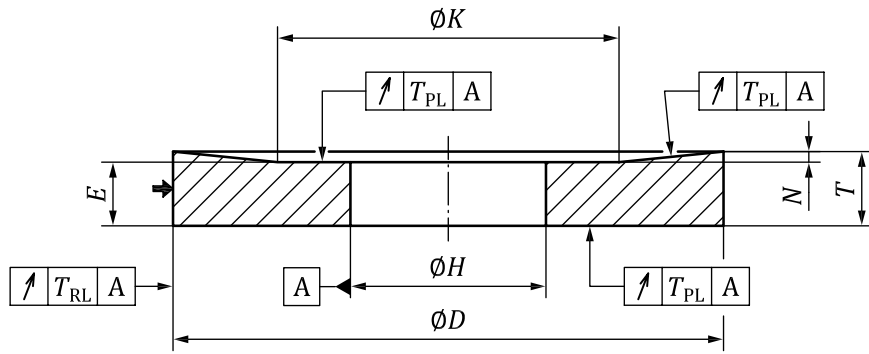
Grinding wheel, relieved on one side (Type 20)
